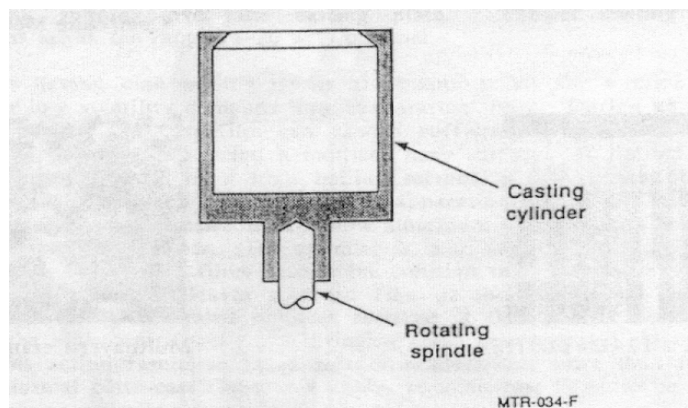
Schematic of a spin-casting mold. (From Kaelble.)
